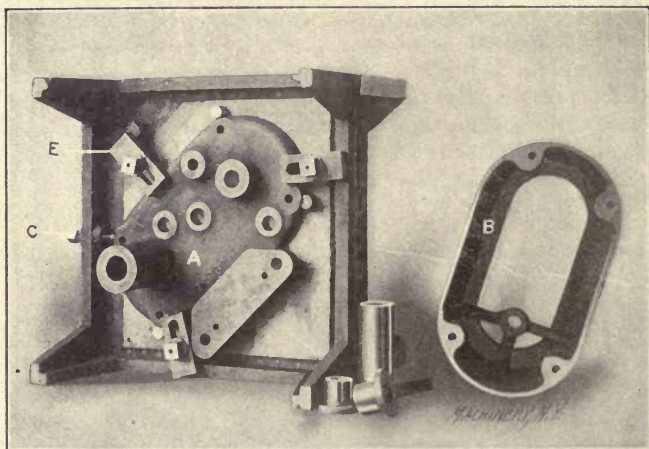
Drill Jig shown in Fig. 75 with Work in Place
